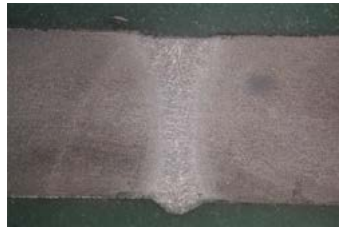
Macrostructure of the laser beam welded joint made of S700MC steel
